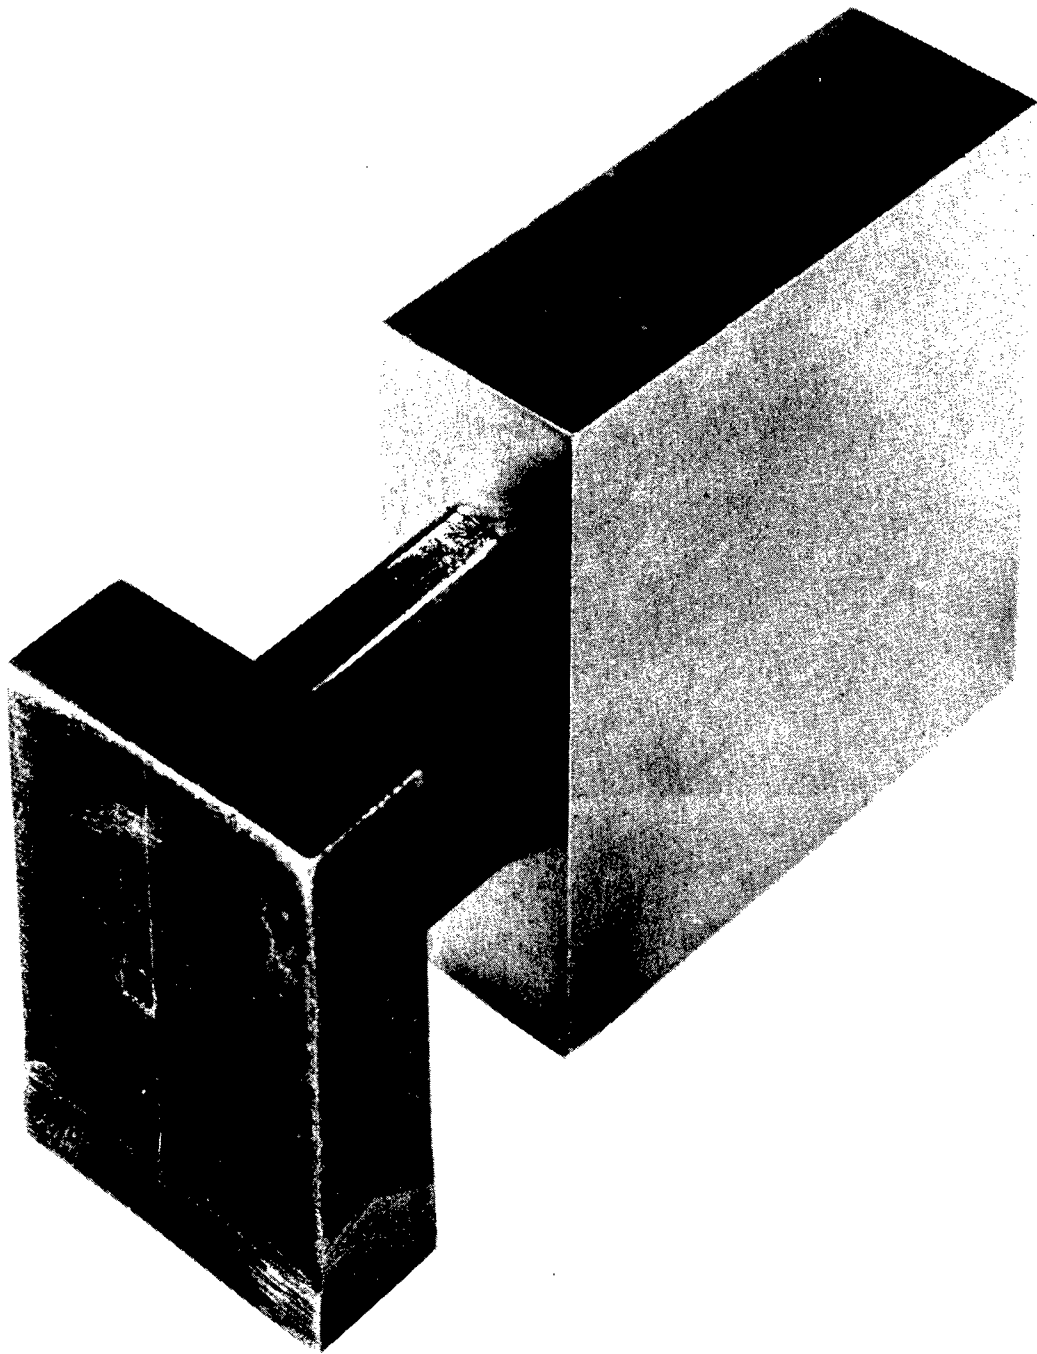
Rectangular Casting With EDM Cap From Carbon Tool.
